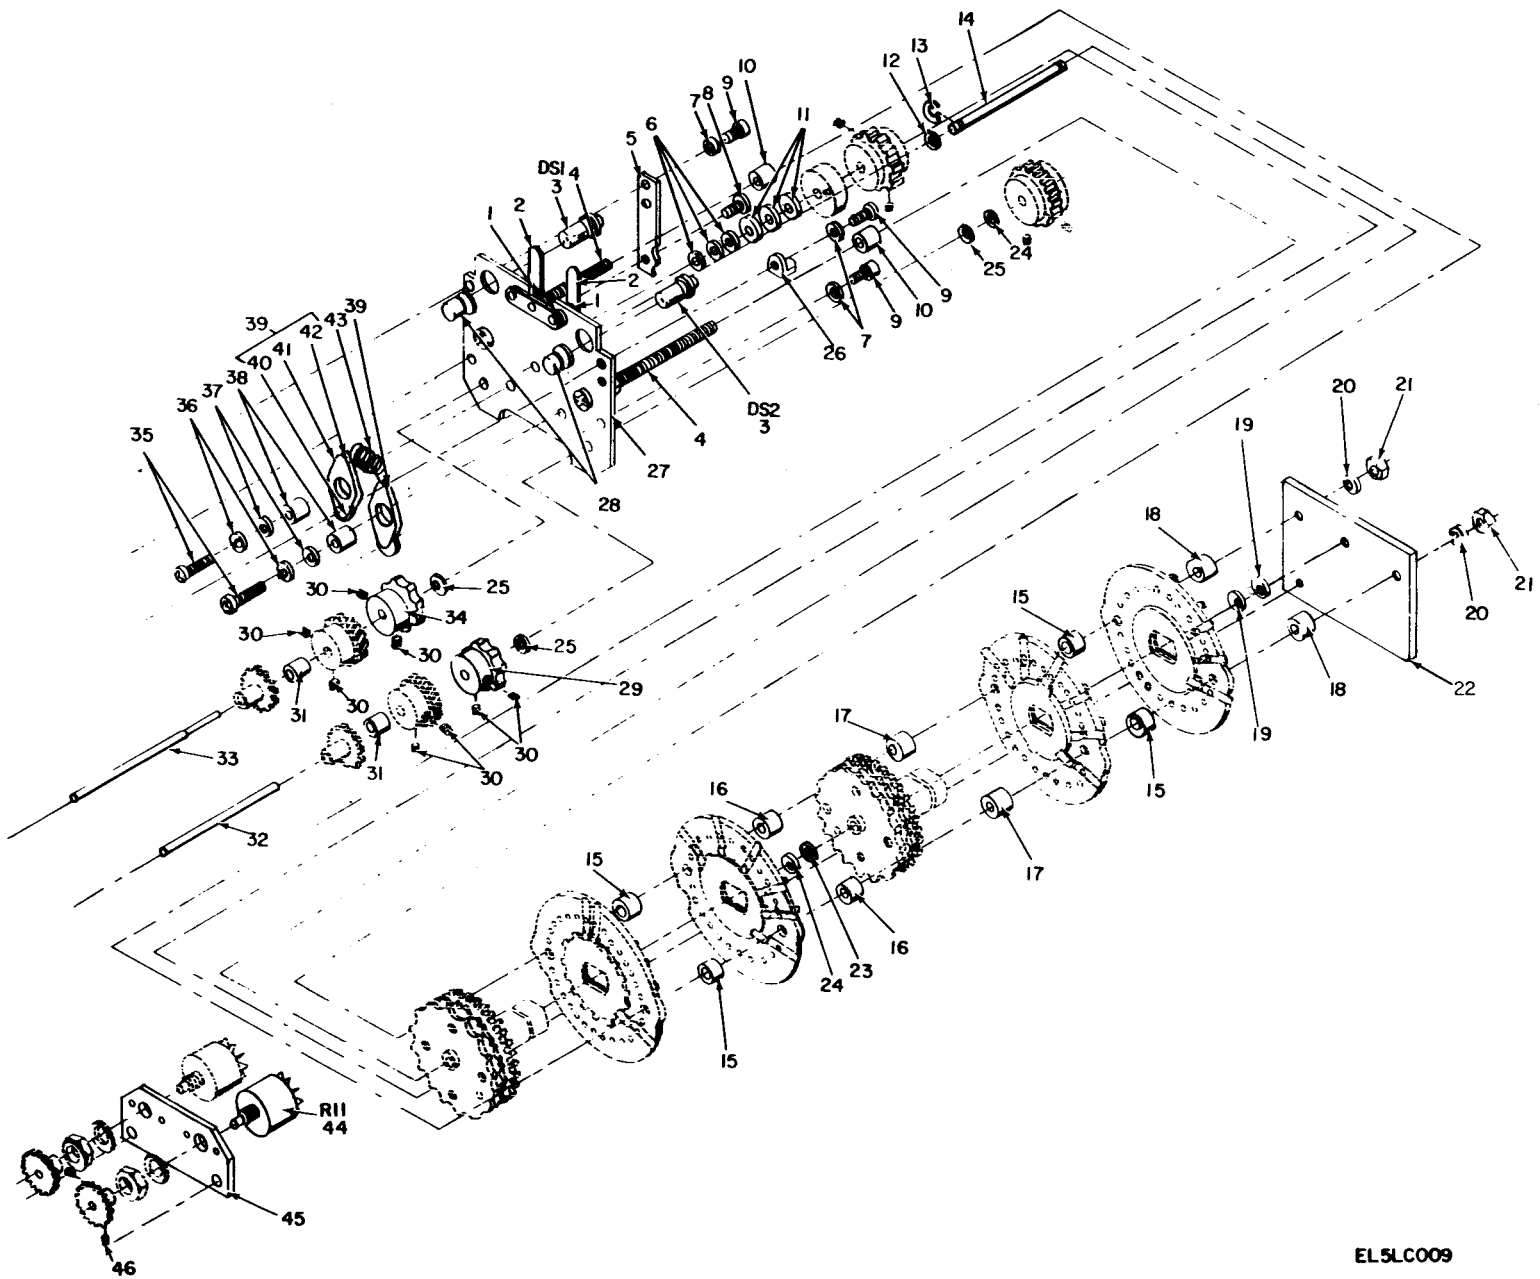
Control, Radio Set C-7241/ARC, Switch Assembly 117449-1.
